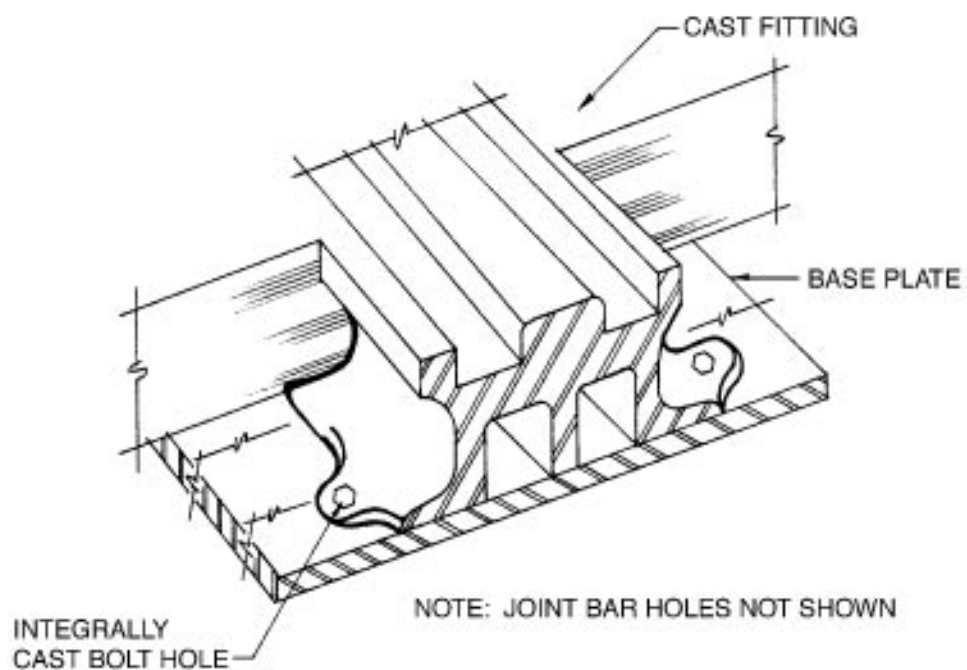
Fitting with Double Flangeway Extension and Integrally Cast Bolt Holes.
